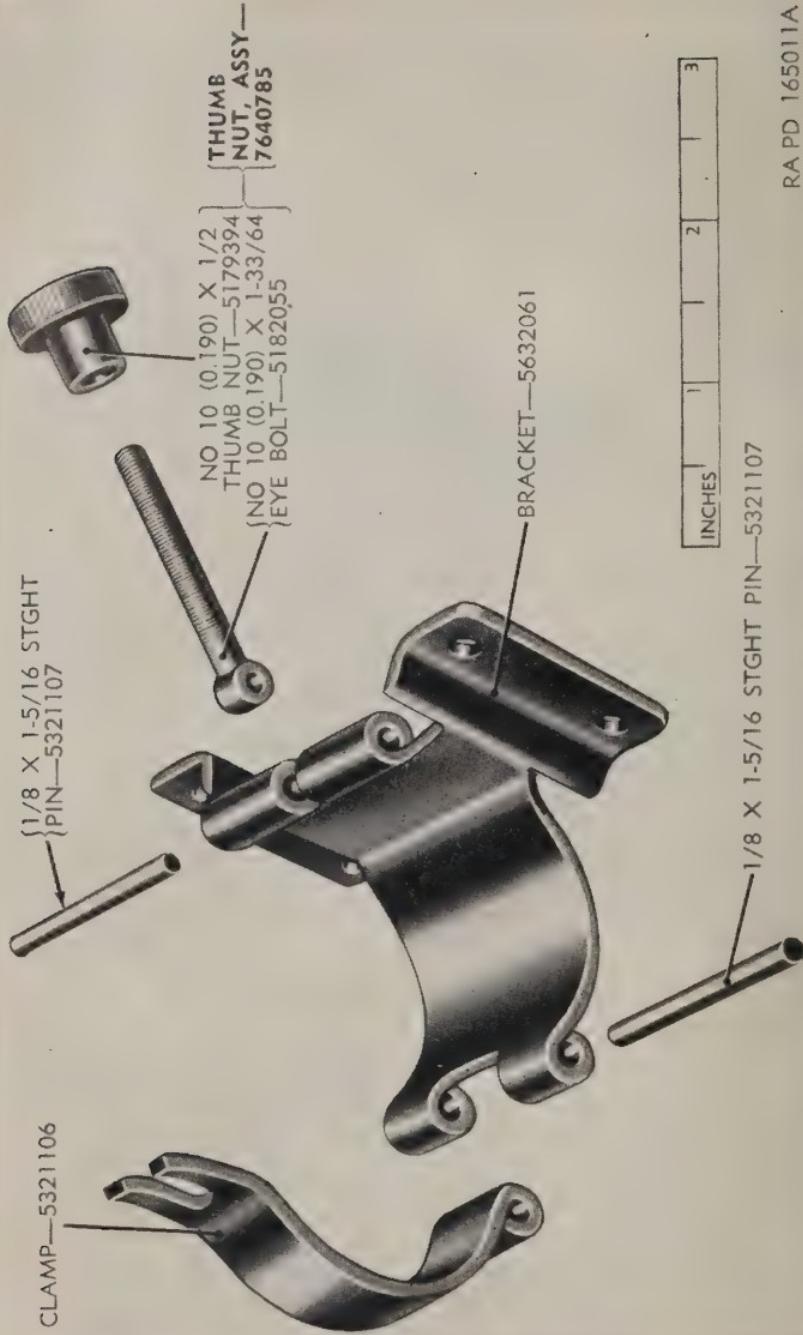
Telescope mount M28—instrument light clamp assembly—exploded view.
